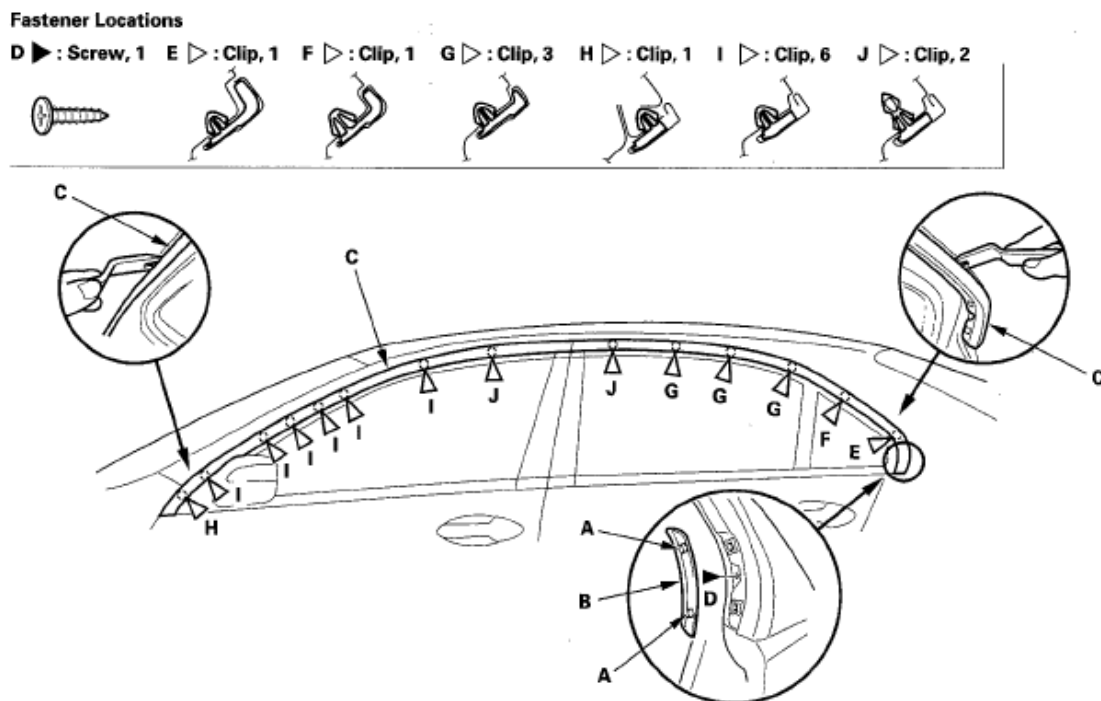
Identifying Rear Pillar Trim Cover, Roof Drip Molding And Hooks
